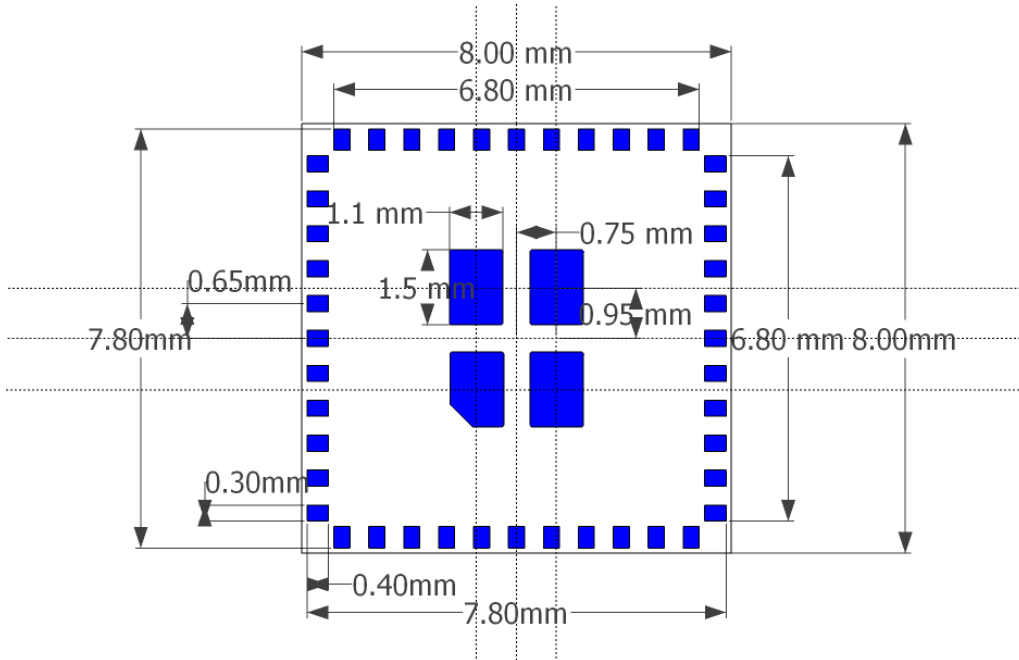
HDG200 Pad pattern, top view, units in mm
